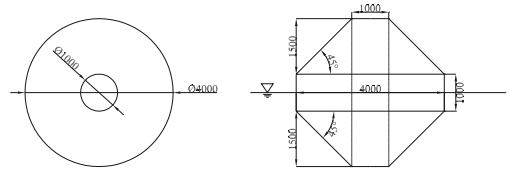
The buoy geometry. The dimensions are in millimeters.
